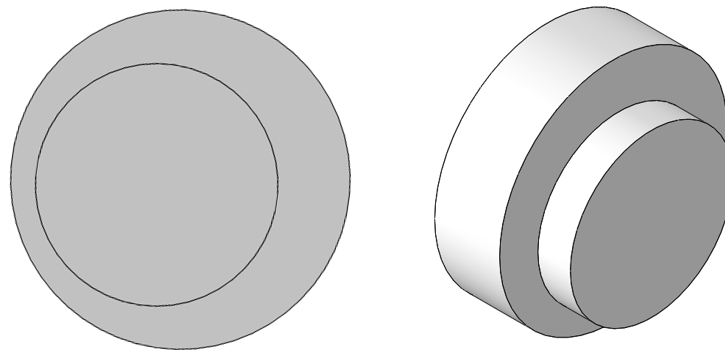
A CAD model of an eccentric workpiece geometry. The left figure shows a top view, the right figure shows an isometric view.
